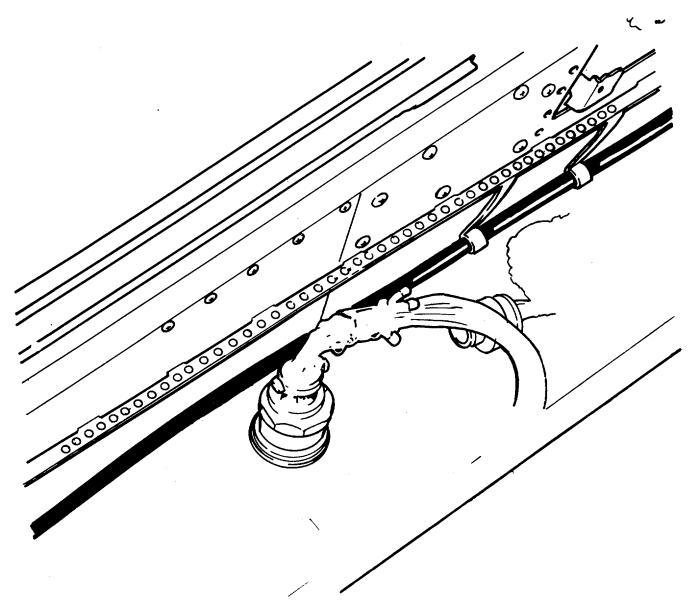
Routing of Coaxial Cable and Installation of Resistor Assembly (Sheet 3 of 3).
